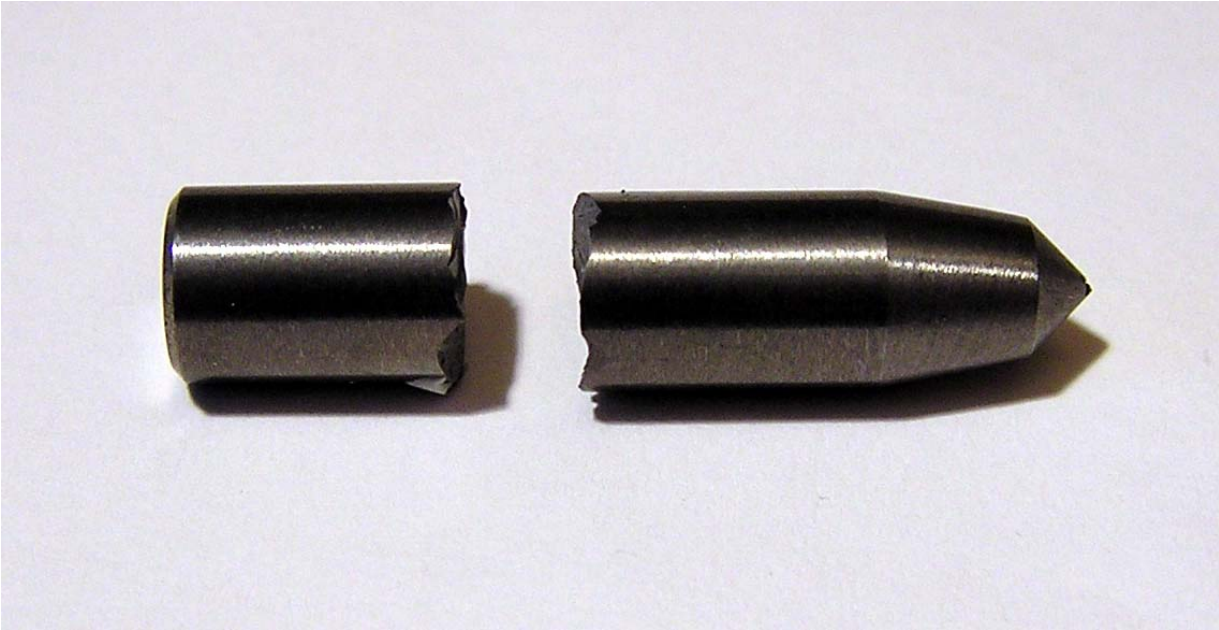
The hardmetal test specimen ($d=7$ mm) after fracturing due to bending
